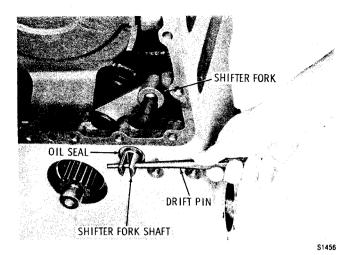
Removing disconnect shifter shaft (-1 models with output disconnect)
